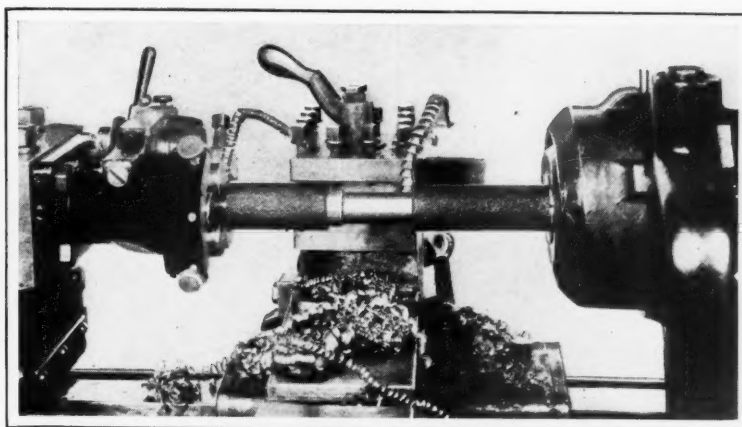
Taking Combined Cuts by having Tool in Square Turret and Tool Mounted in Hexagon Turret Cutting at the Same Time
